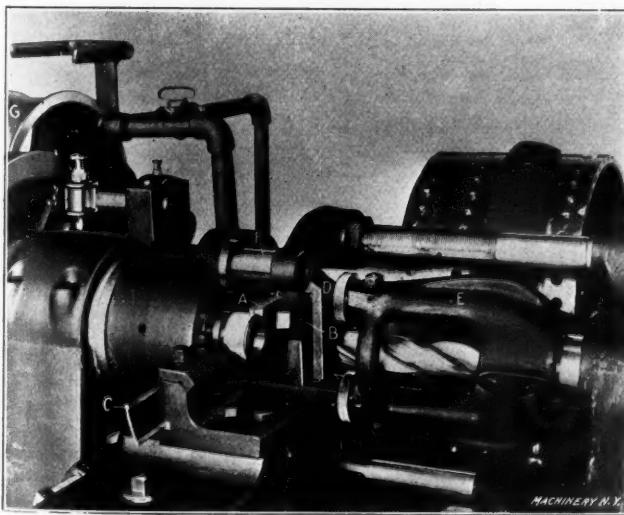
Arrangement of Tools for Making Knurled Nut Blanks shown in Fig. 1
